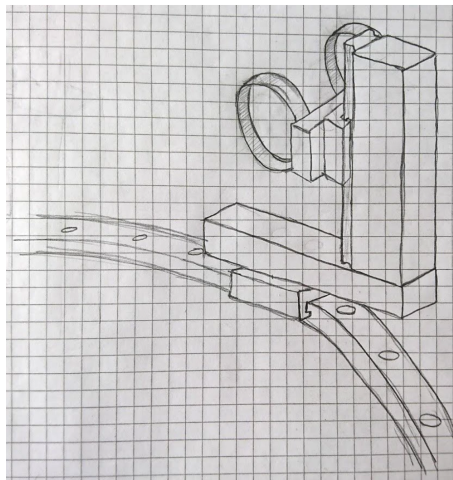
Detailed view of carriage and the tool attachment on vertical rails.
